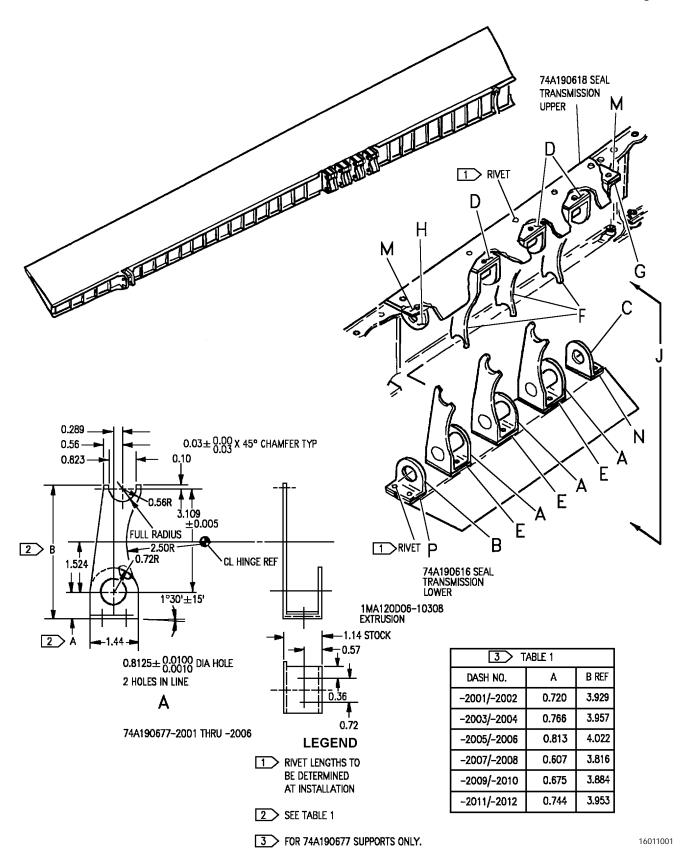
Transmission Seal Assembly, 74A190678, Replacement (Sheet 1)
